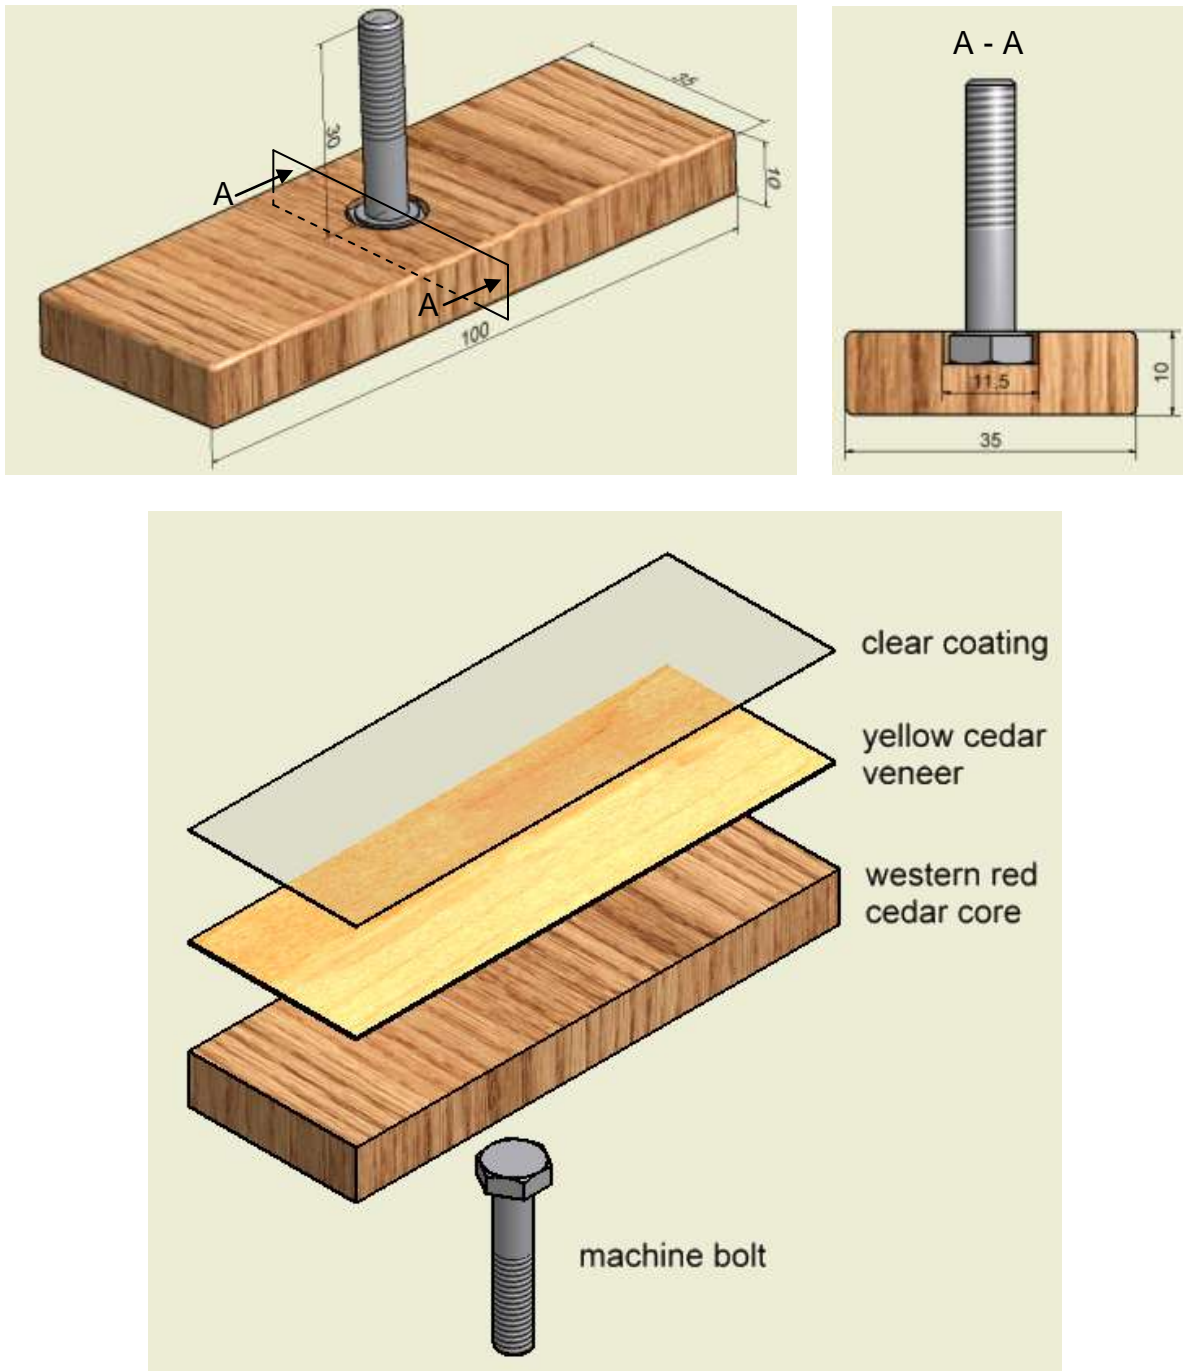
Top: Veneered wood composite block with attached stainless steel machine bolt (left) and detail A-A of drilled hole to accommodate machine bolt (right). Bottom: Exploded view of coated wood composite assembly. Note: grain direction of wood block shown above does not represent the actual grain direction
